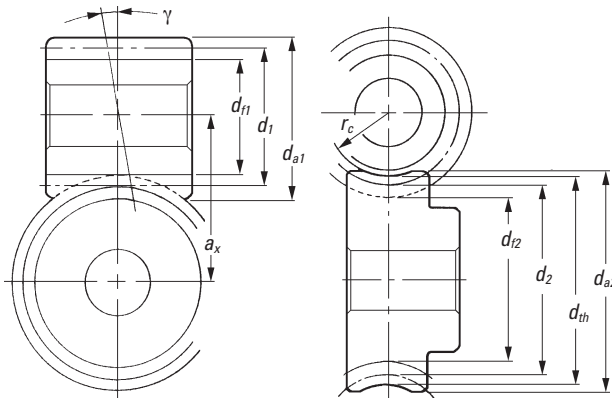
Dimensions of Cylindrical Worm Gears
